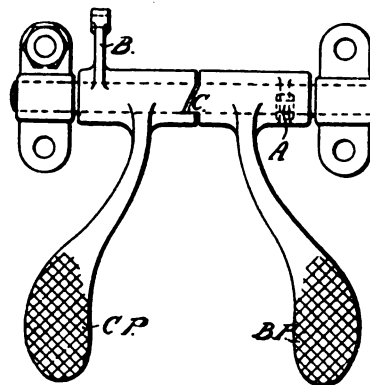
INTERCONNECTION OF CLUTCH AND BRAKE PEDAL.
